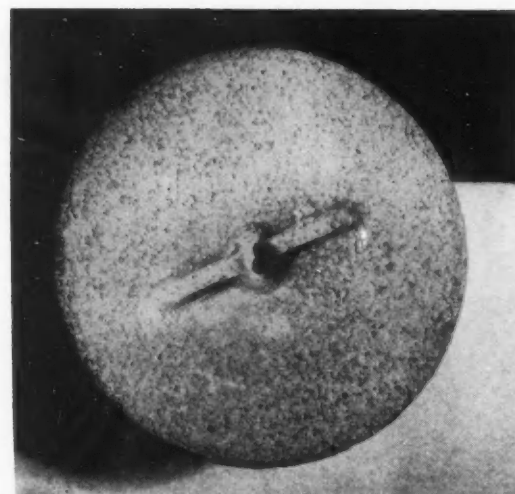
Exhaust Valve, Enlarged, Showing the Deposit on the Seat and on the Head
